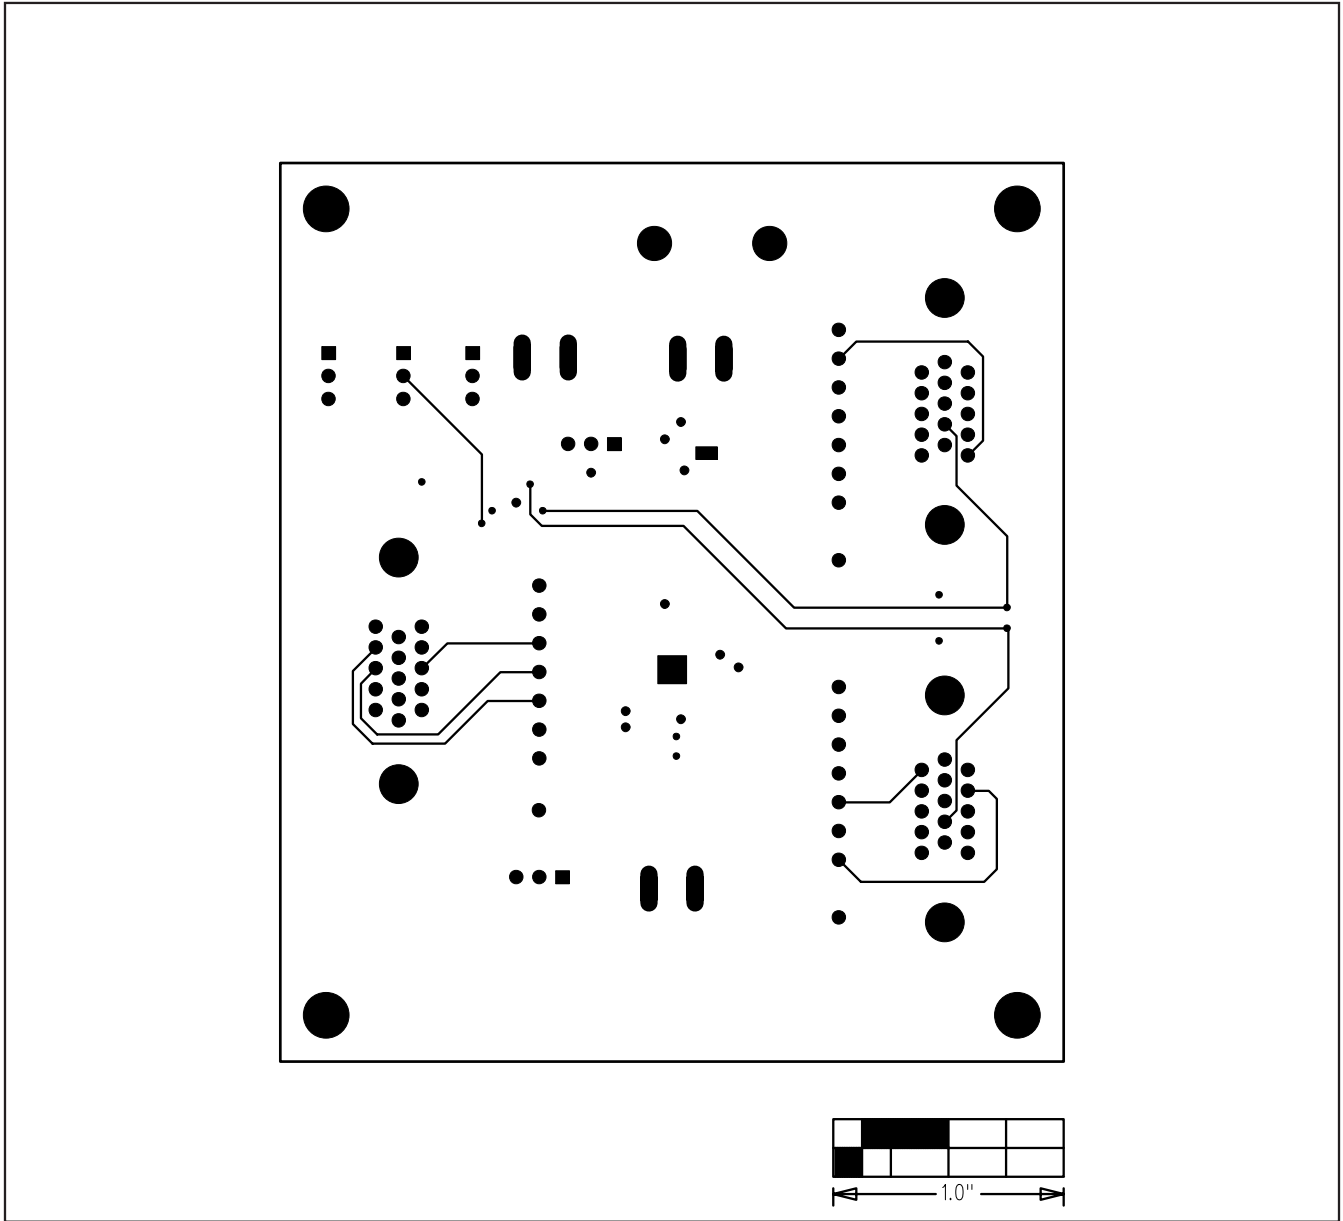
MAX4885 EV Kit PCB Layout—Solder Side
